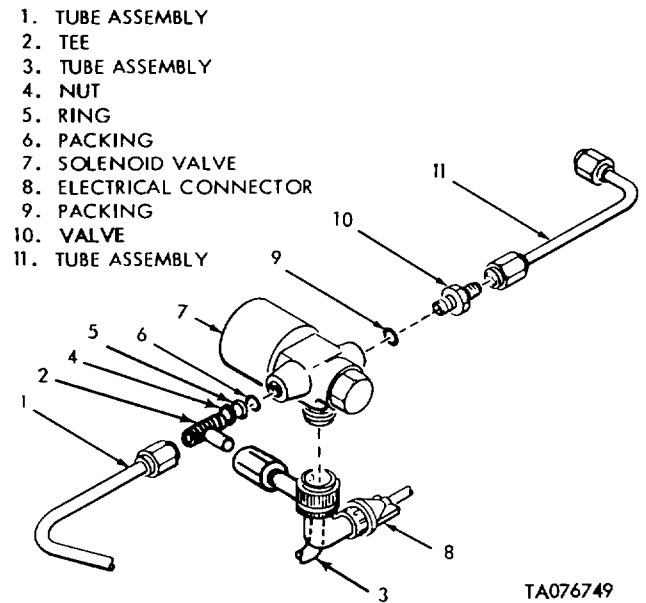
D. Elevation Retract Lockout Control Solenoid Valve.
